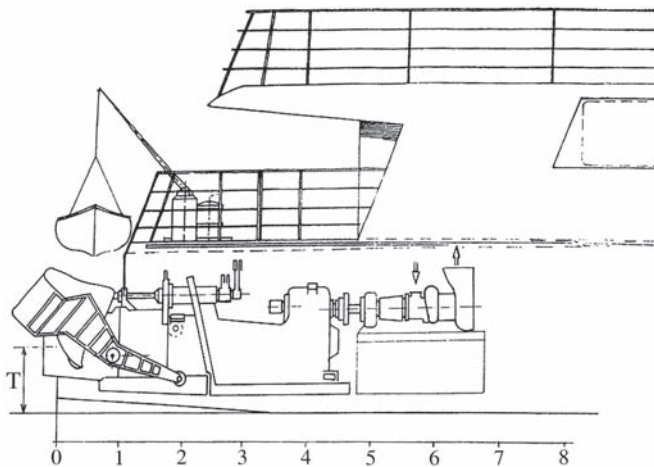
Arrangement of the waterjet propeller in ship's engine room – side view .
